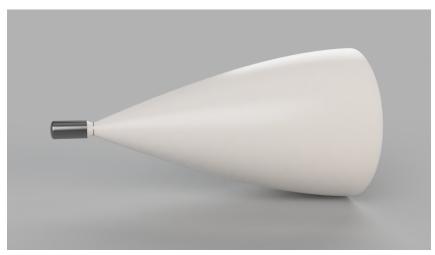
CAD design of the combustion chamber and the nozzle, where the expansion rate is 50
